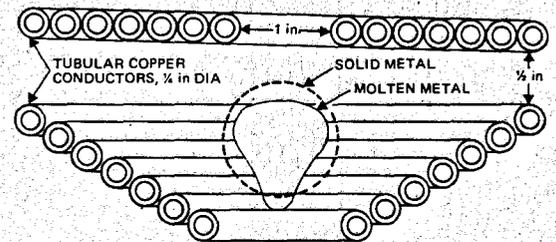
Cross-section through a liquidmetal levitator using water-cooled tubes as primary windings.
